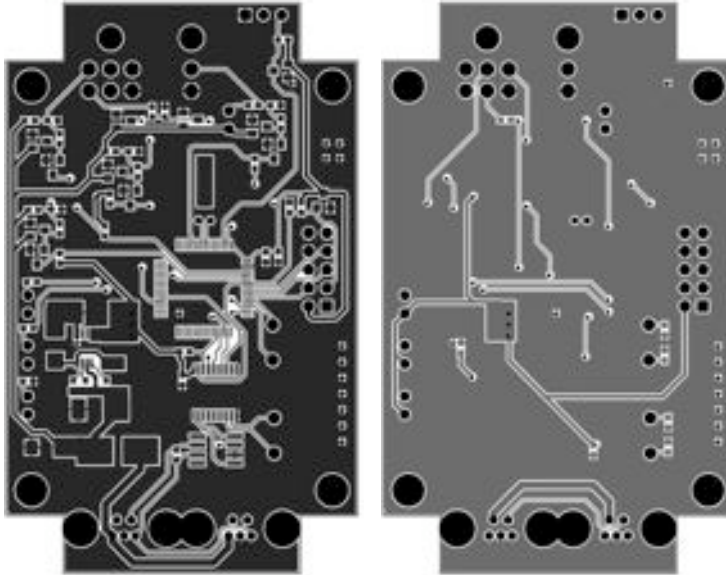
Brake Sensor PCB: Top and bottom layer silkscreen.
